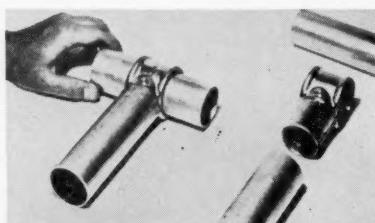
Modern pipe and fitting assemblies are easily handled with chemical adhesives.
